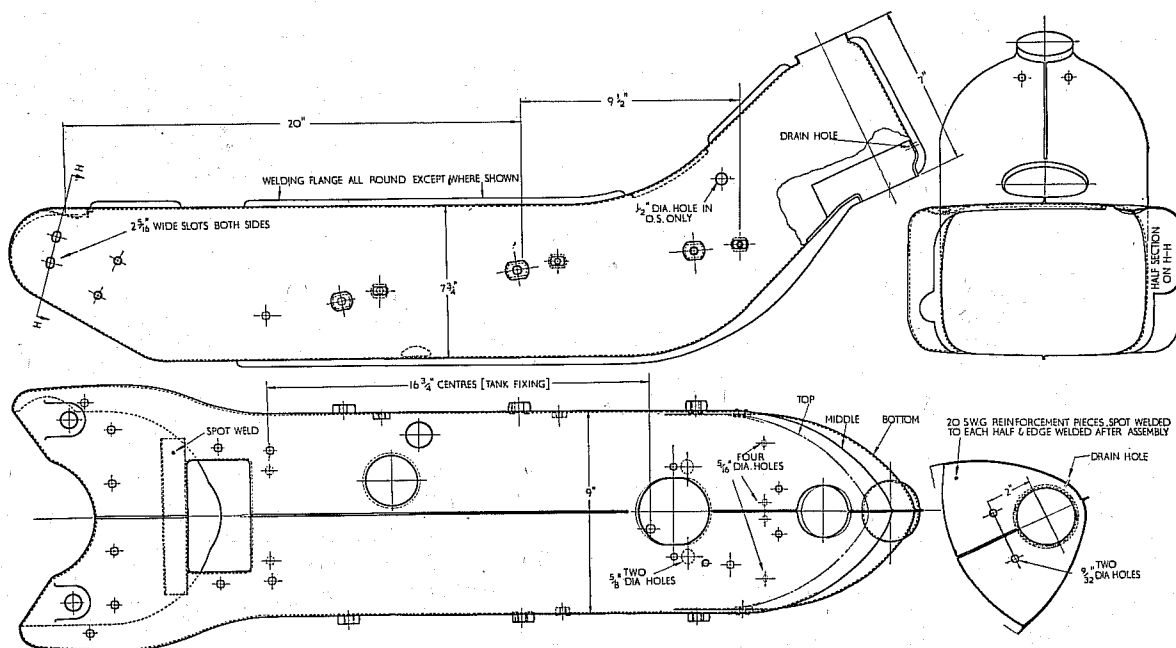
(below).—Dimensioned drawing of main frame material 20-s.w.g. steel (deep drawing). The Quasi-Arc Co. Ltd.'s "Vortic" 16-gauge electrodes are used in the fabrication of the frame
